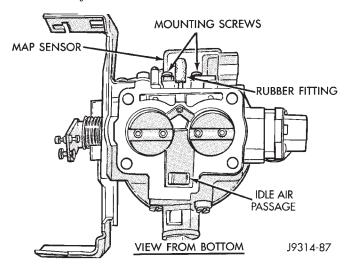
Throttle Body Air Control Passage—5.2L Engine
